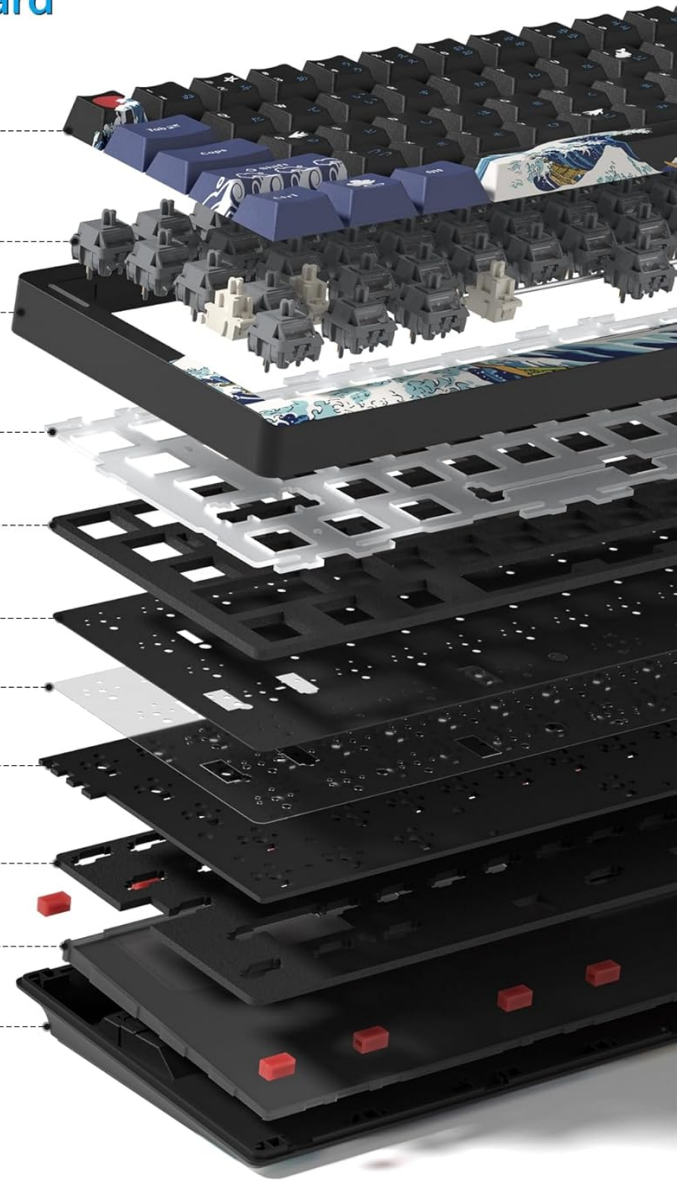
Exploded view diagram showing the internal layers and gasket mount structure of the Womier Q61-Kanagawa keyboard.
